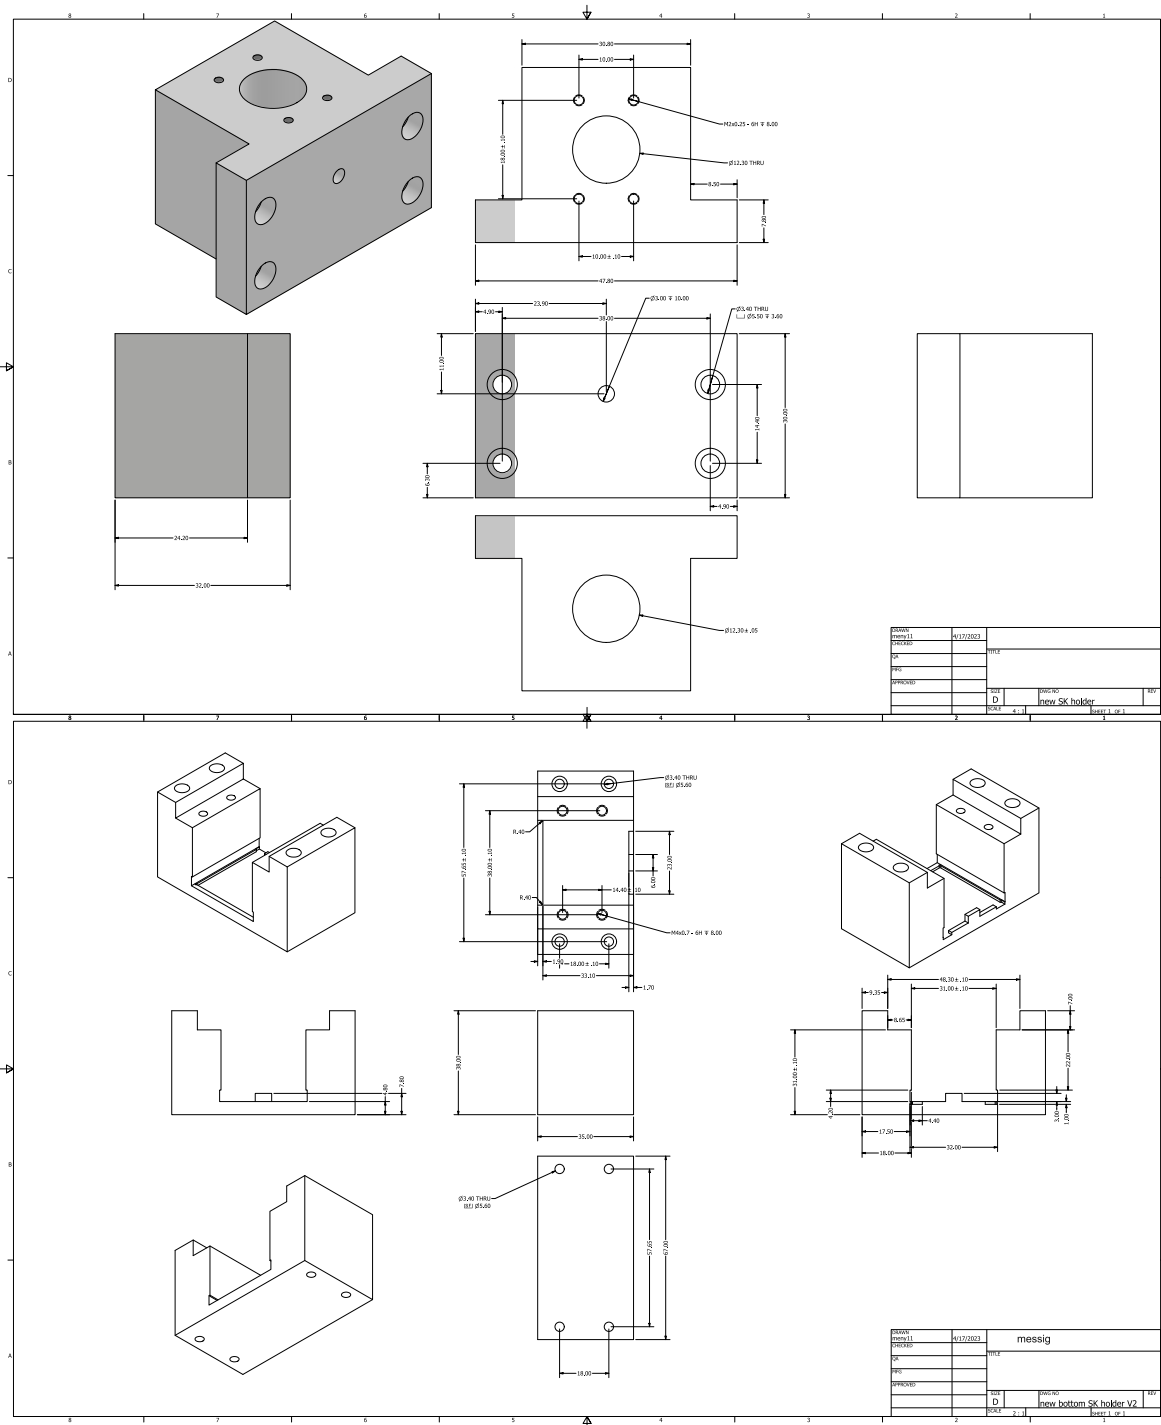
The injection lock diode mount. The sketches of both the mount that holds the laser diode and the one that transfers heat to the brass plate. These bottom and top parts were carefully designed to place the TEC element to optimize heat conductivity.
